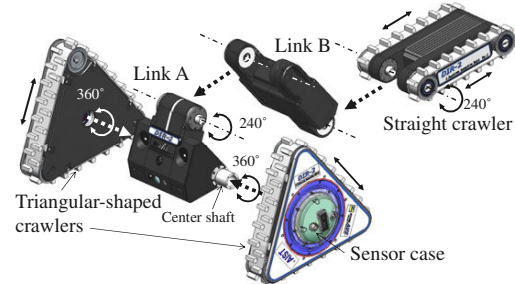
Assembly diagram showing 5 components and 8 driving parts.
